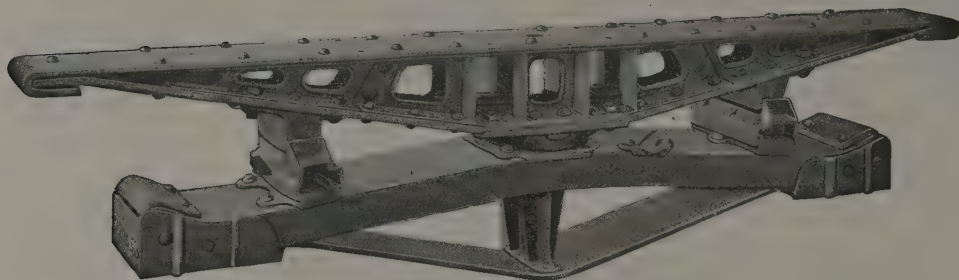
Simplex Body Bolster with Cast Steel Web Filler, in Position on Simplex Truck Bolster with Susemihl Roller Side Bearings. American Steel Foundries.
